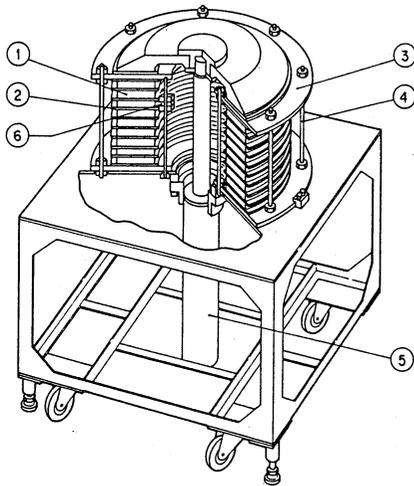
Sketch of the working stand for ferrite stack assembly; 1. Ferrite ring, 2. Copper cooling disk, 3. FRP disk (20mm thickness), 4. FRP rod (ø20mm), 5. Oil hydraulic press and 6. Alignment mechanism.
